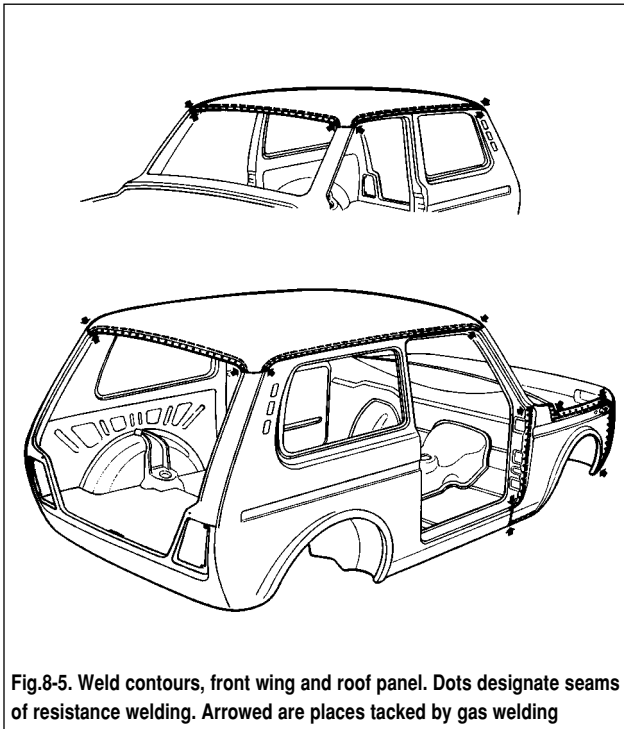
Weld contours, front wing and roof panel. Dots designate seams of resistance welding. Arrowed are places tacked by gas welding
